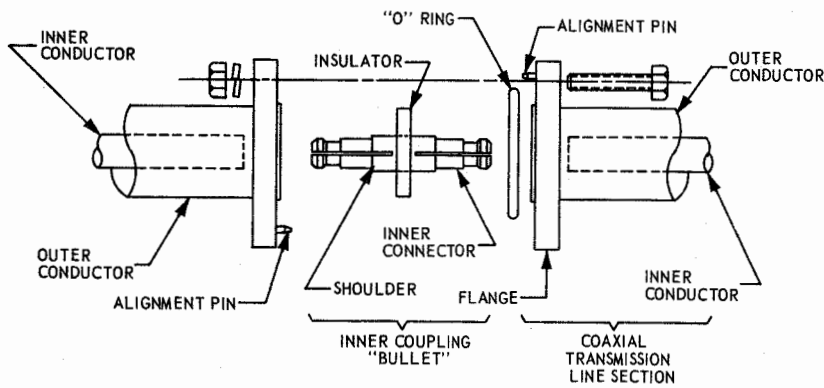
Rigid Coaxial Transmission Line Parts and Nomenclature
